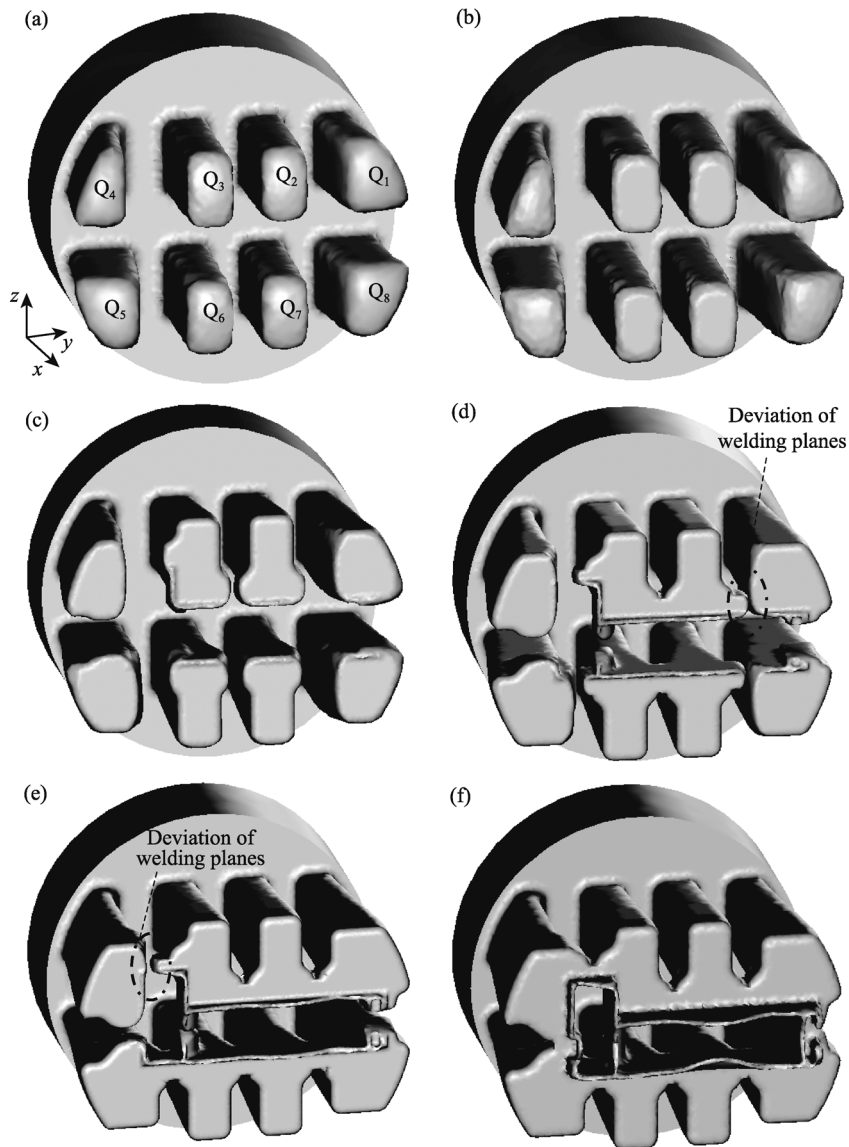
Metal flowing behaviors in various extrusion stages: (a) flowing into the portholes ($S=29.6$ mm); (b) filling the welding chamber ($S=39.1$ mm); (c) filling the welding chamber ($S=47.9$ mm); (d) welding of the metal below the porthole bridge ($S=50.3$ mm); (e) welding of the metal in the drain hole ($S=50.9$ mm); (f) flowing out of the die orifice ($S=52.0$ mm).
